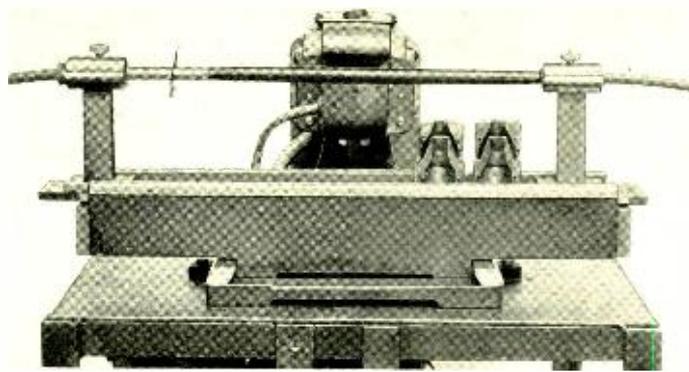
The two parts of the extrusion die which apply paragutta to a cable joint can be seen resting on top of the machine
